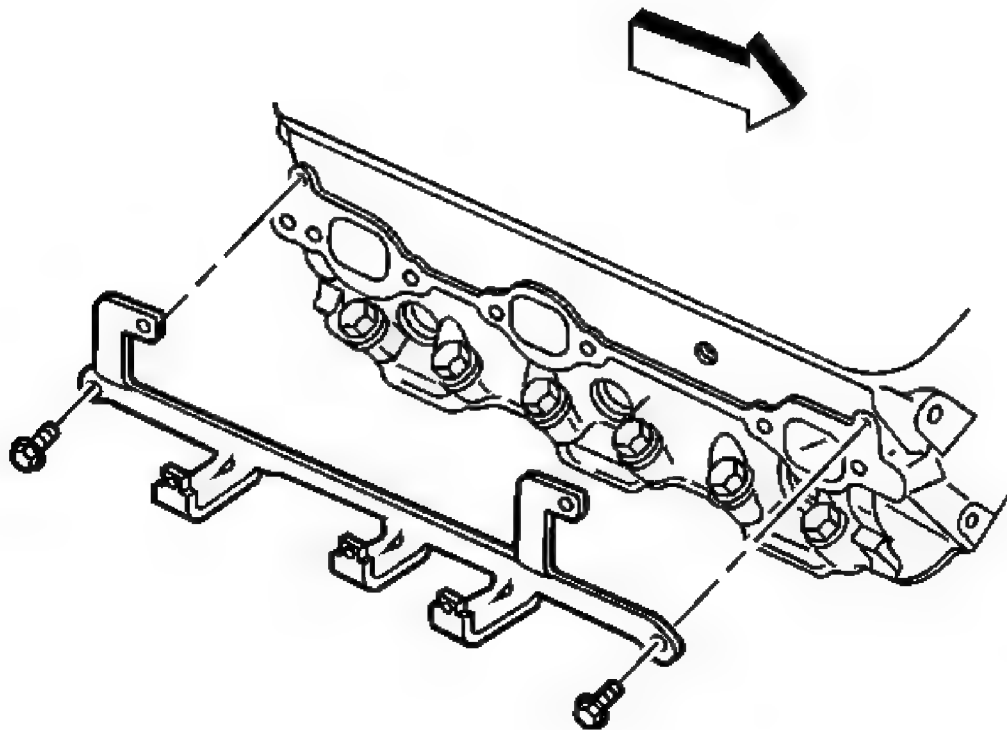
View Of Spark Plug Wire Support Bolt (Right)
